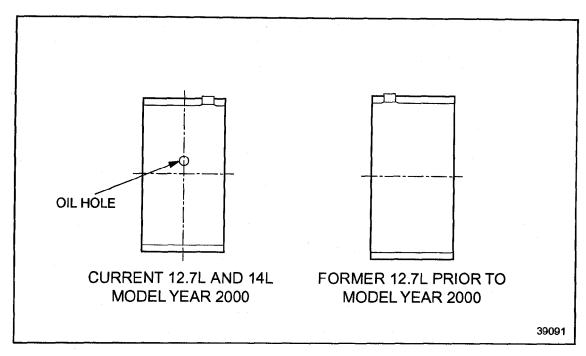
Connecting Rod Bearings for 14 L and 12.7 L Engines
